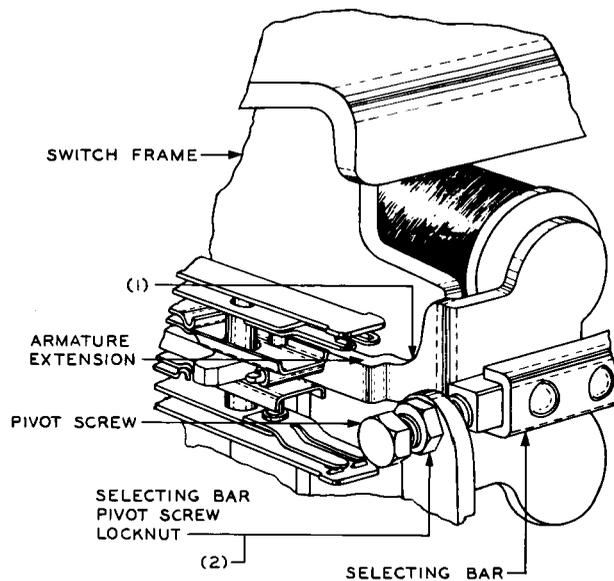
Fig. C — Clearance Between Selecting Armature Extension and Switch Frame
